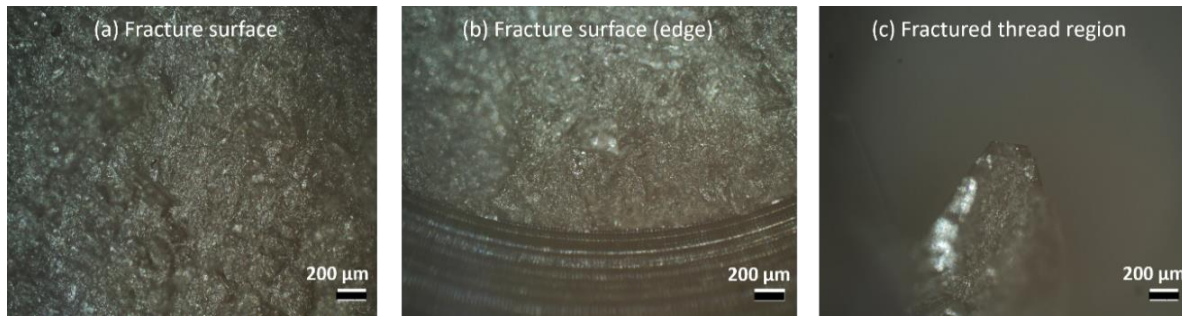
Optical micrographs of the fracture surface for the AM bolt with 2.5% porosity (S2.5) samples: (a) and (b) fracture surface; (c) location of fracture in the threaded region. Fracture occurred in the threaded region.
